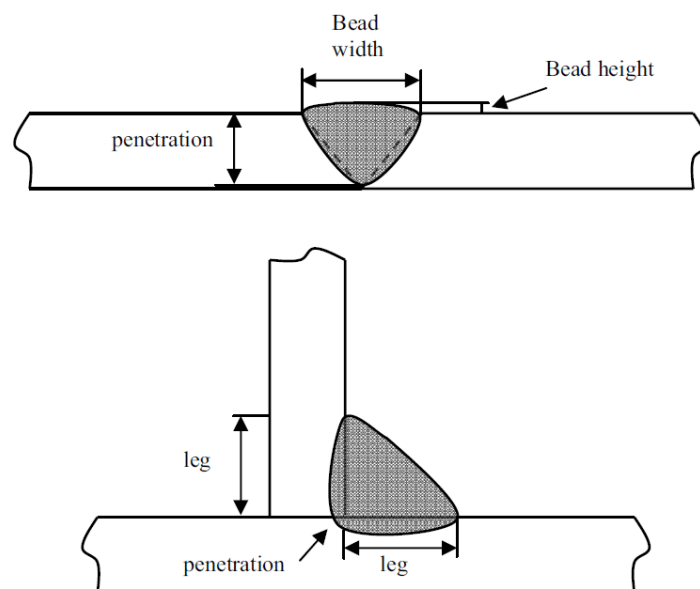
V-groove and fillet welds geometrical parameters
